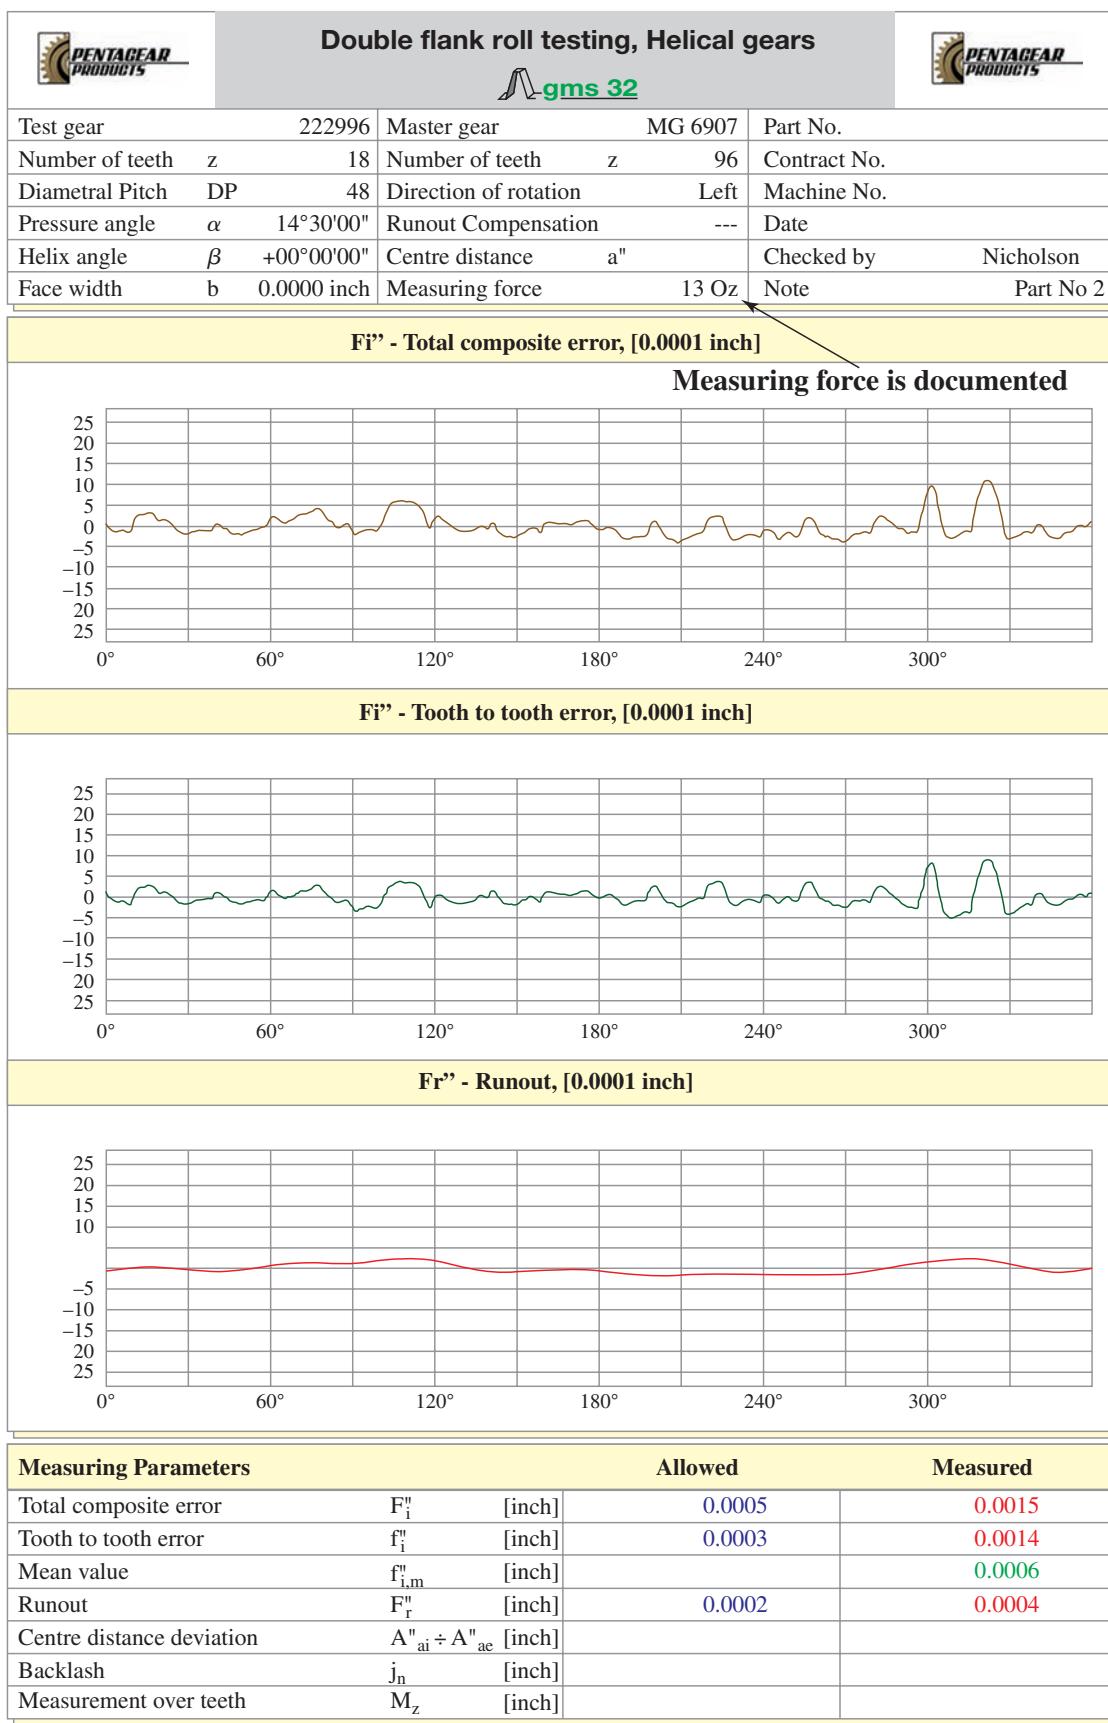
Example of a report from a double flank roll test of a gear.
